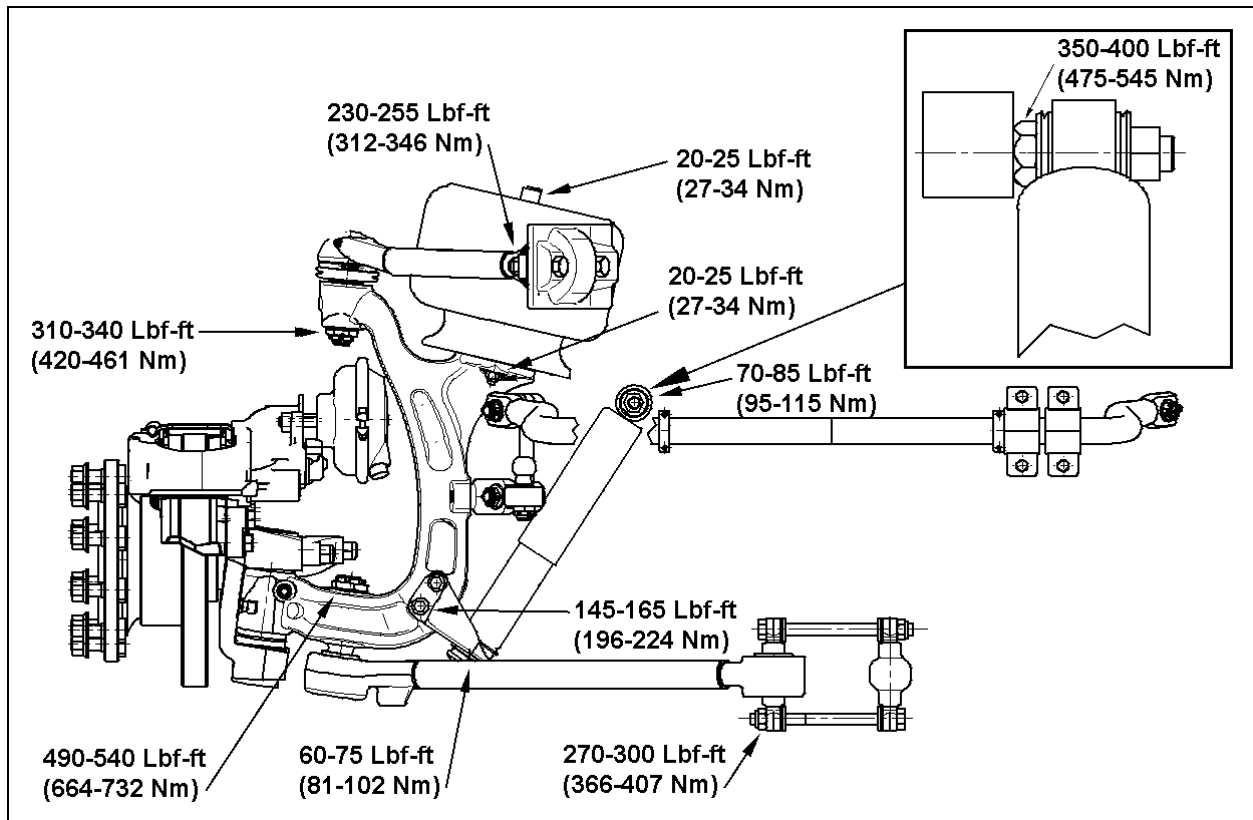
AIR SPRING AND SHOCK ABSORBER 16145
